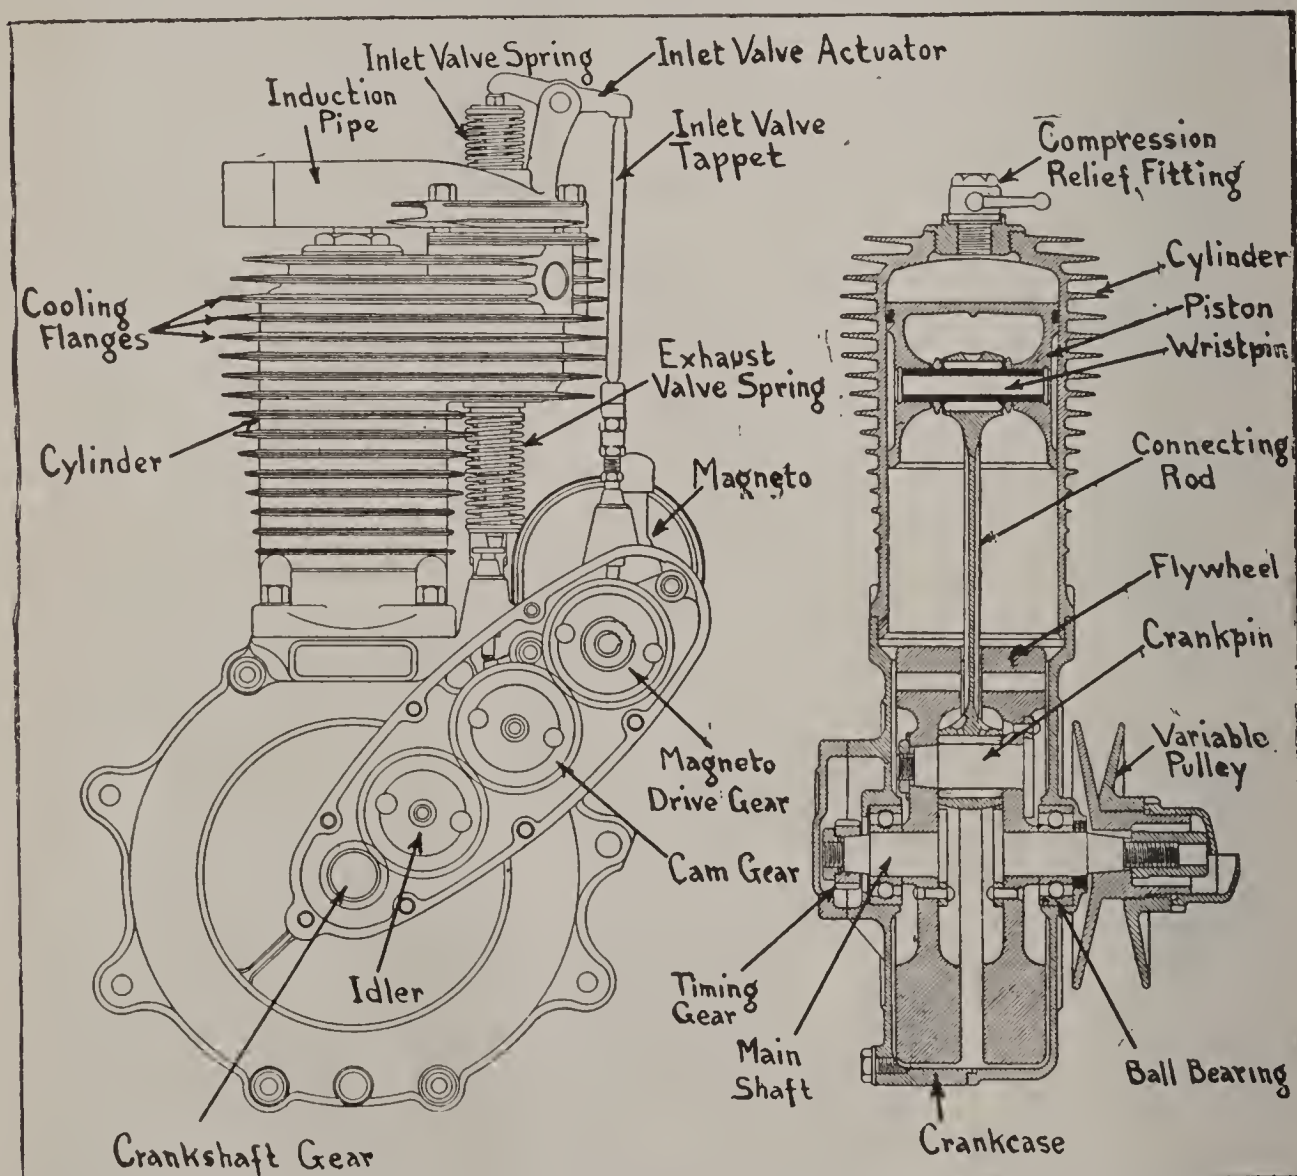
Typical Single Cylinder Power Plant of English Design.
